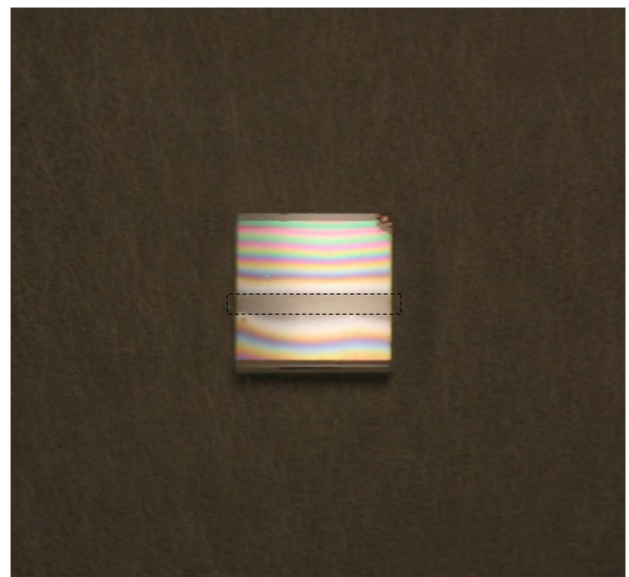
(Color online) USP laser one-edge sealing with multi-line welding the area without interference fringe is showing the welded region.
